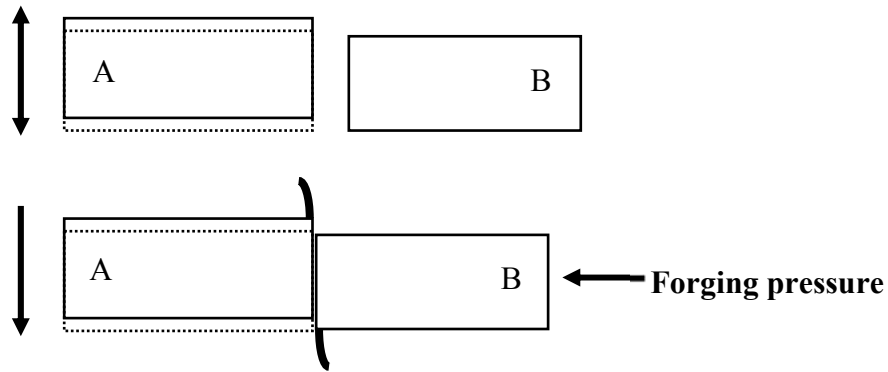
3 The schematic diagram of linear friction welding in this study.
